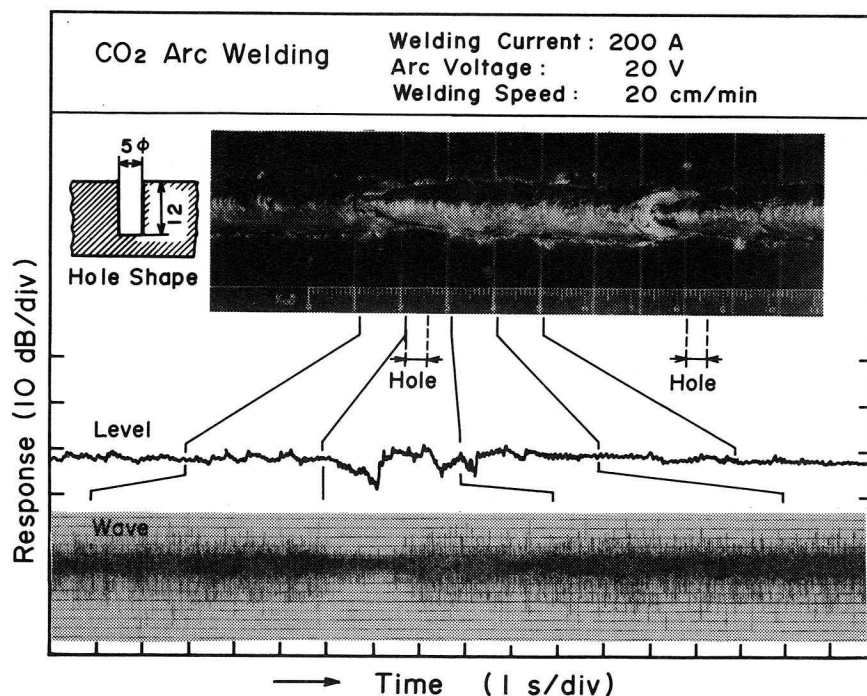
Example of hole detected by arc sound in CO₂ arc welding. (hole diameter: 5 mm)
